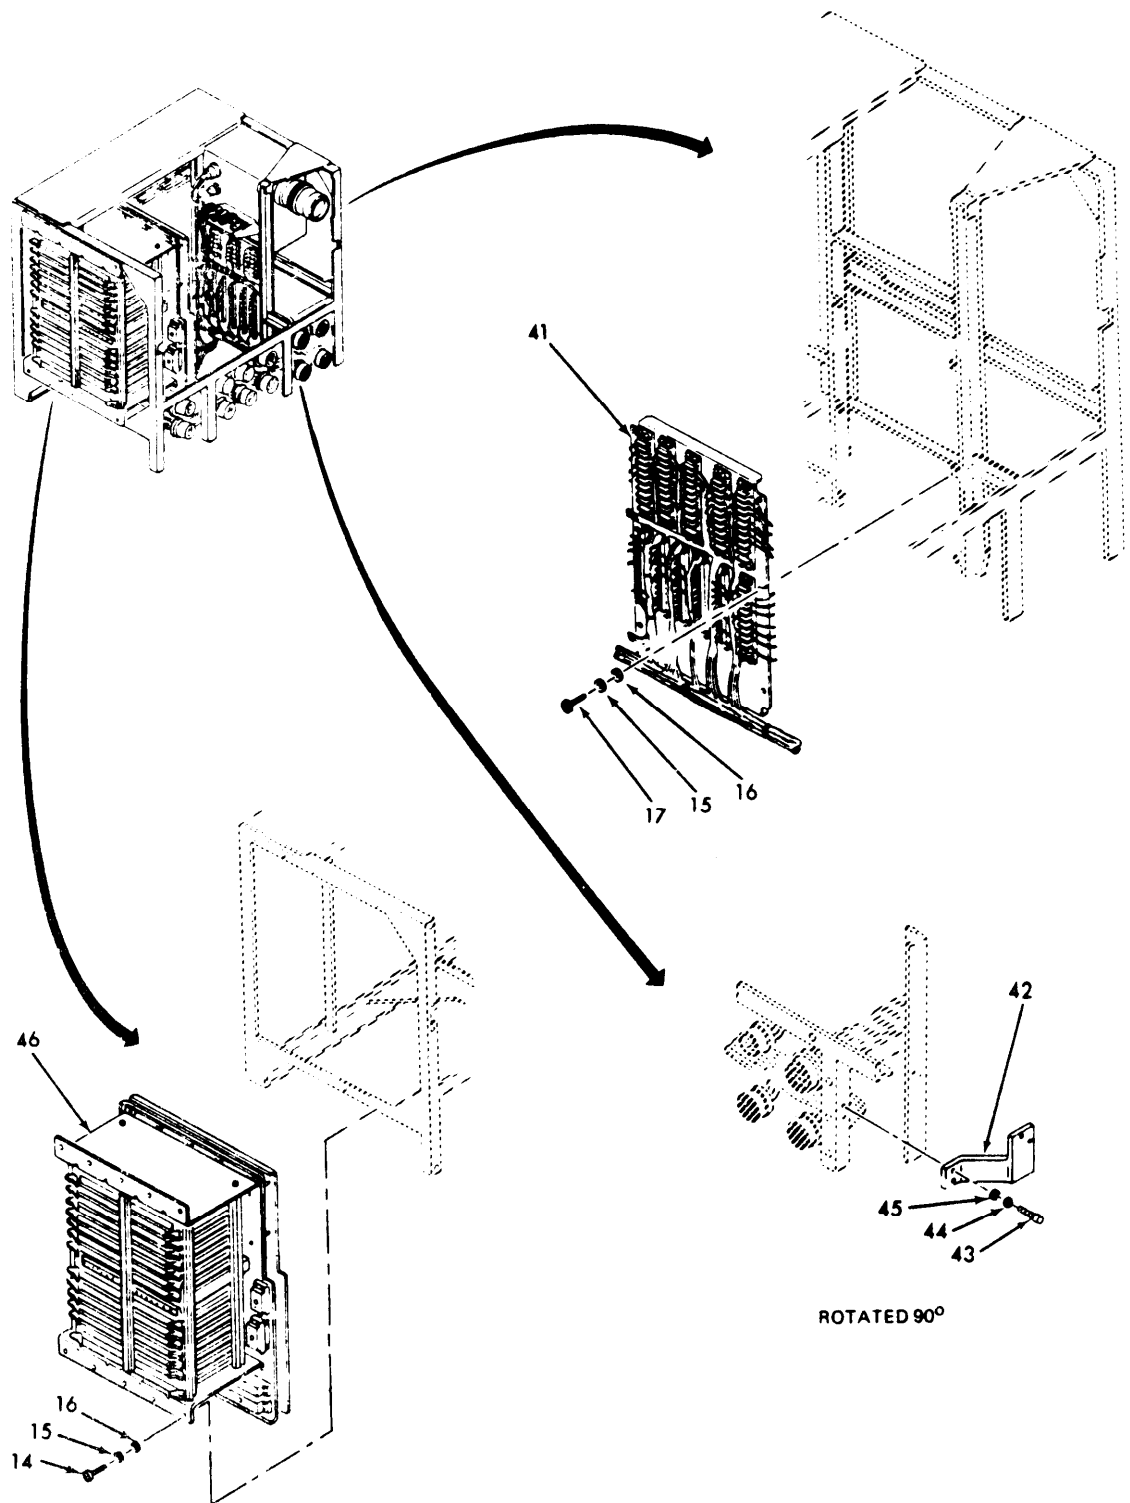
THERMAL SYSTEM TEST CONTROLLER CHASSIS
